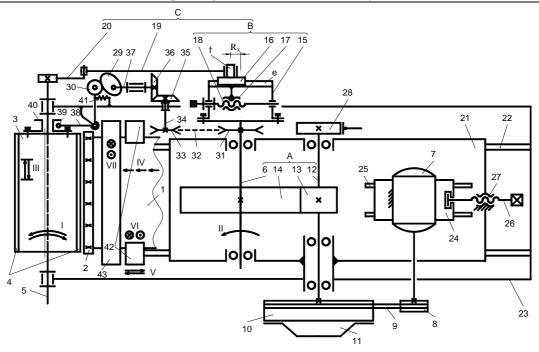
The cinematic diagram of a sheet metal expanding machine with oscillatory main motion (including shaft axes)
